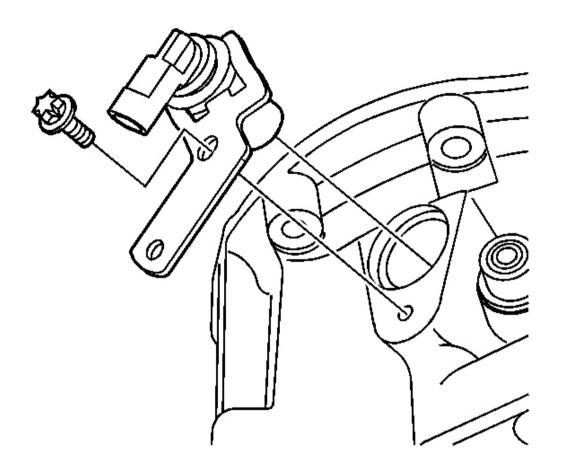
Vehicle Speed Sensor & Bolt Courtesy of GENERAL MOTORS CORP.
